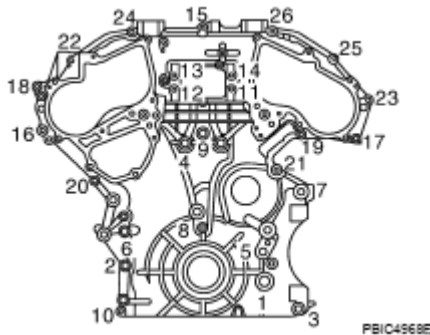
Identifying Front Timing Chain Case Mounting Bolts Tightening Sequence
